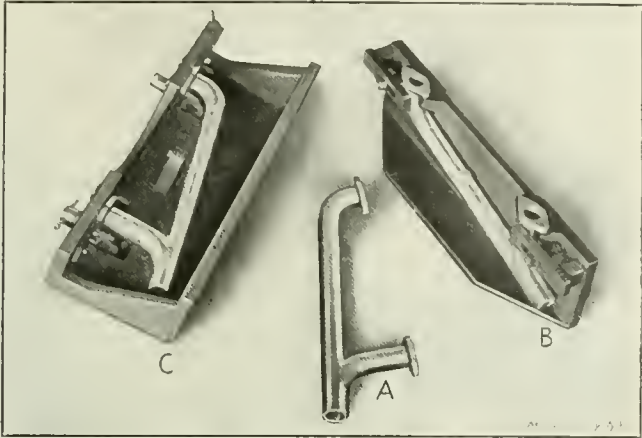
Milling and Drilling Jigs for the Outlet Water Pipes
